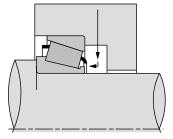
Axial oil jet to direct oil at small end of the rollers.
